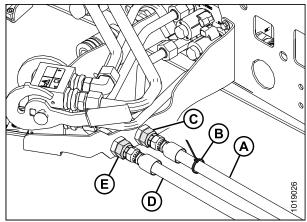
Deck Hydraulic Hoses and Multicoupler Connections (Parts Removed for Clarity)
